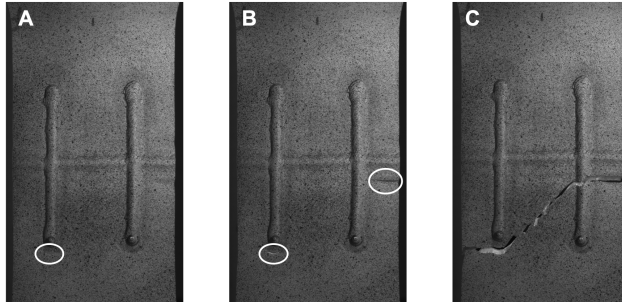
Fracture of specimen with cross weld speed 22 mm/s, with PWHT.
